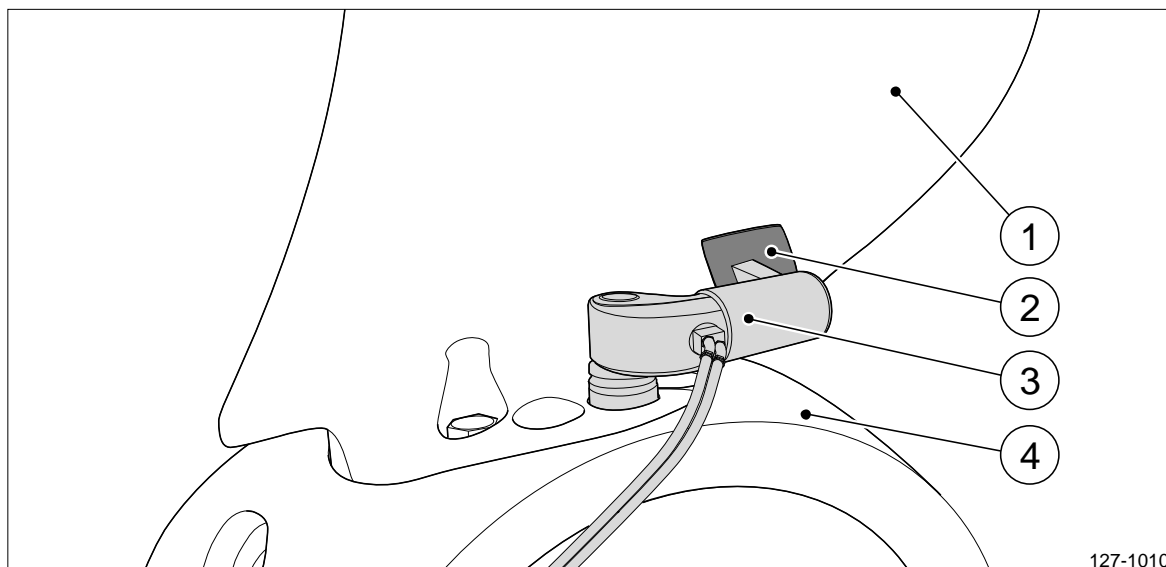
Final tightening of the blade bolts alternative 2: Torque tool used..
